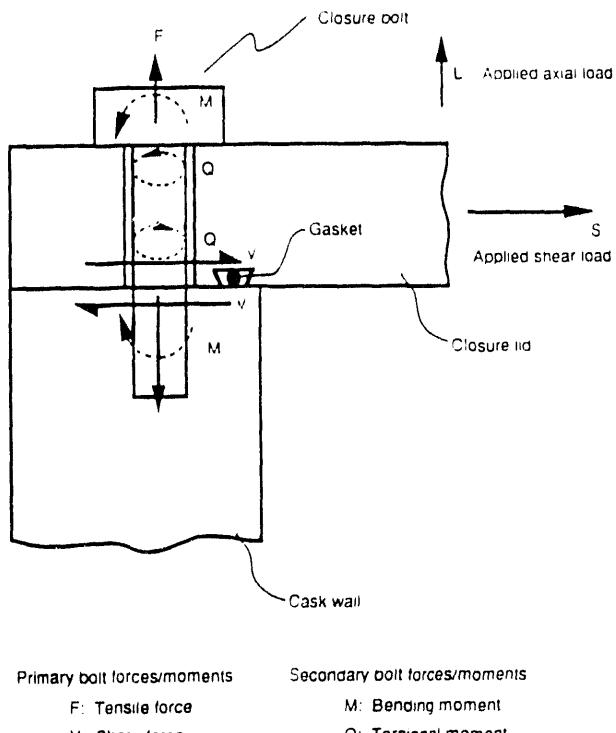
COMPONENTS OF A SHIPPING-CASK BOLTED CLOSURE AND FORCES WHICH MAY EXIST IN A CLOSURE BOLT
